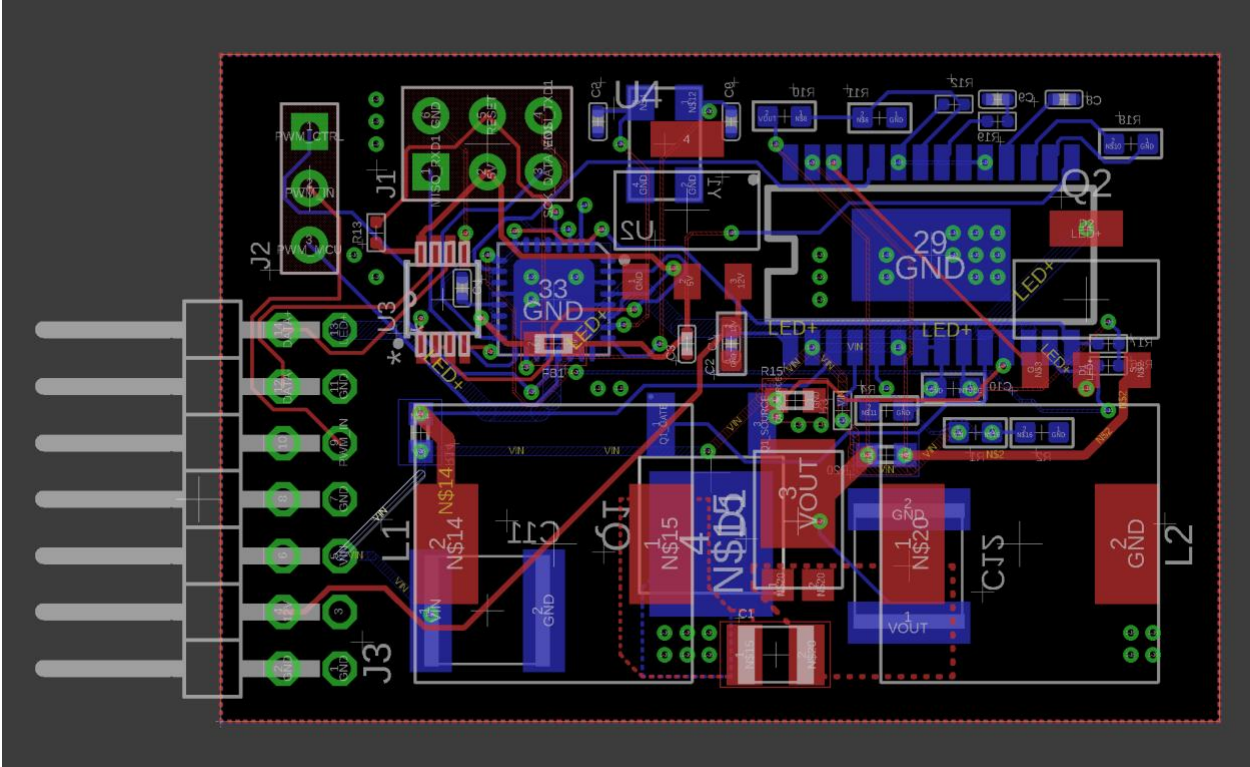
Layout of 30mm x 45mm LED Driver Board
